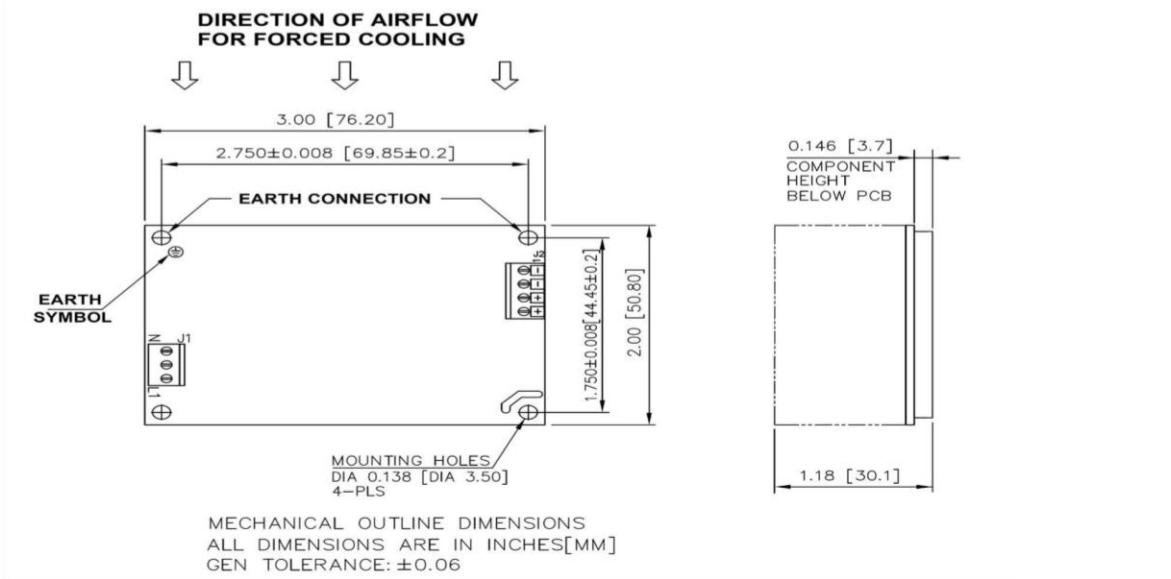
Mechanical Drawing - Screw Terminal (Option 1)
